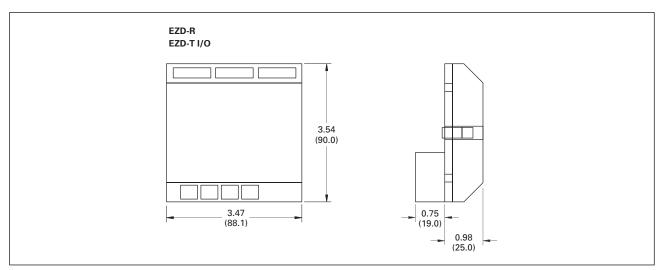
EZD-R/EZD-T I/O Module Dimensions in Inches (mm), Drawing Number MD05013007E
